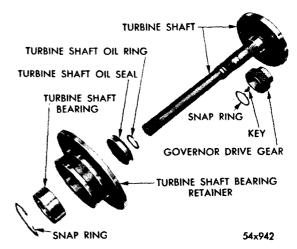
Turbine Shaft Assembly (Exploded View)
